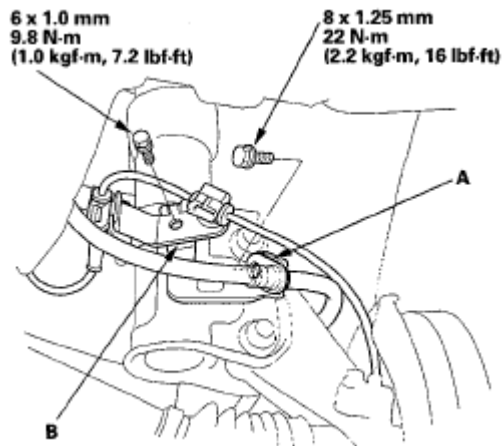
Identifying Brake Hose Bracket And Wheel Sensor Harness Bracket With Torque Specifications
